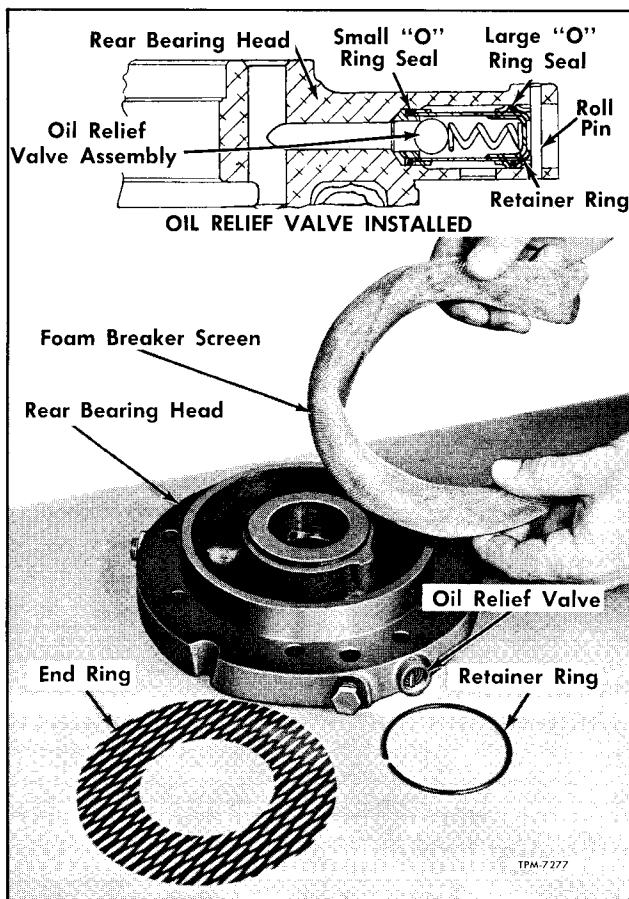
Foam Breaker Screen Removed and Oil Pressure Relief Valve Assembly Installed
